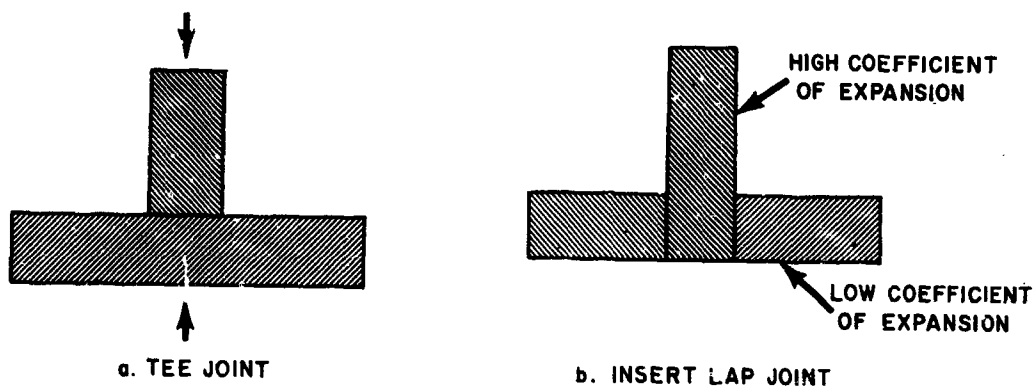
Joint Designs Utilizing Different Diffusion Welding Methods
